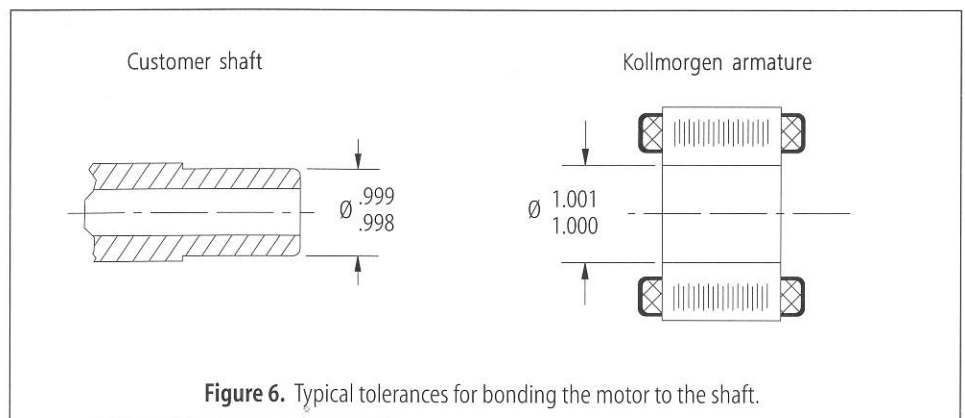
Typical tolerances for bonding the motor to the shaft.
